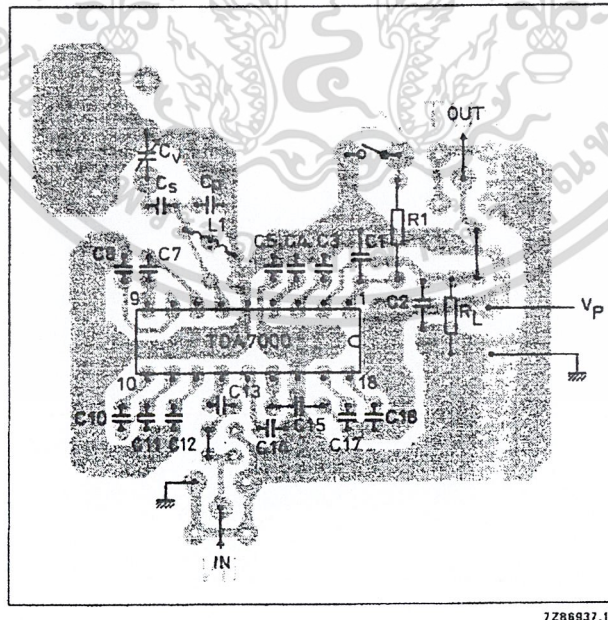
Component side of printed-circuit board showing component layout used for the circuit of Fig.4.
